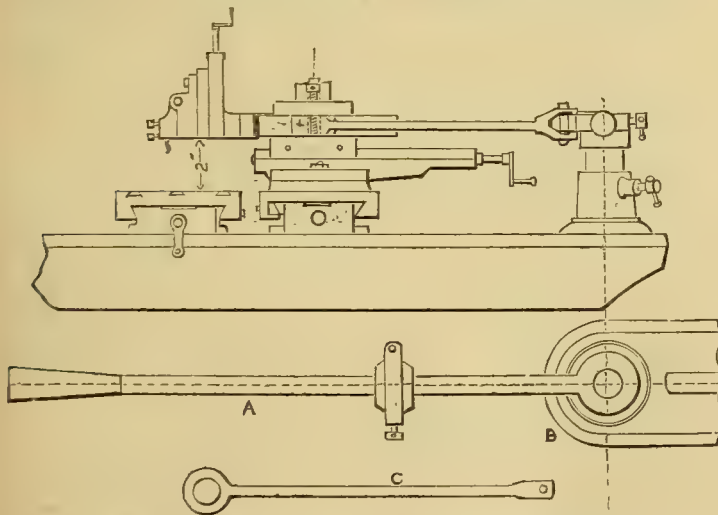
COMPLETE VIEW OF SLIDE FOR LATHE PLANER.
